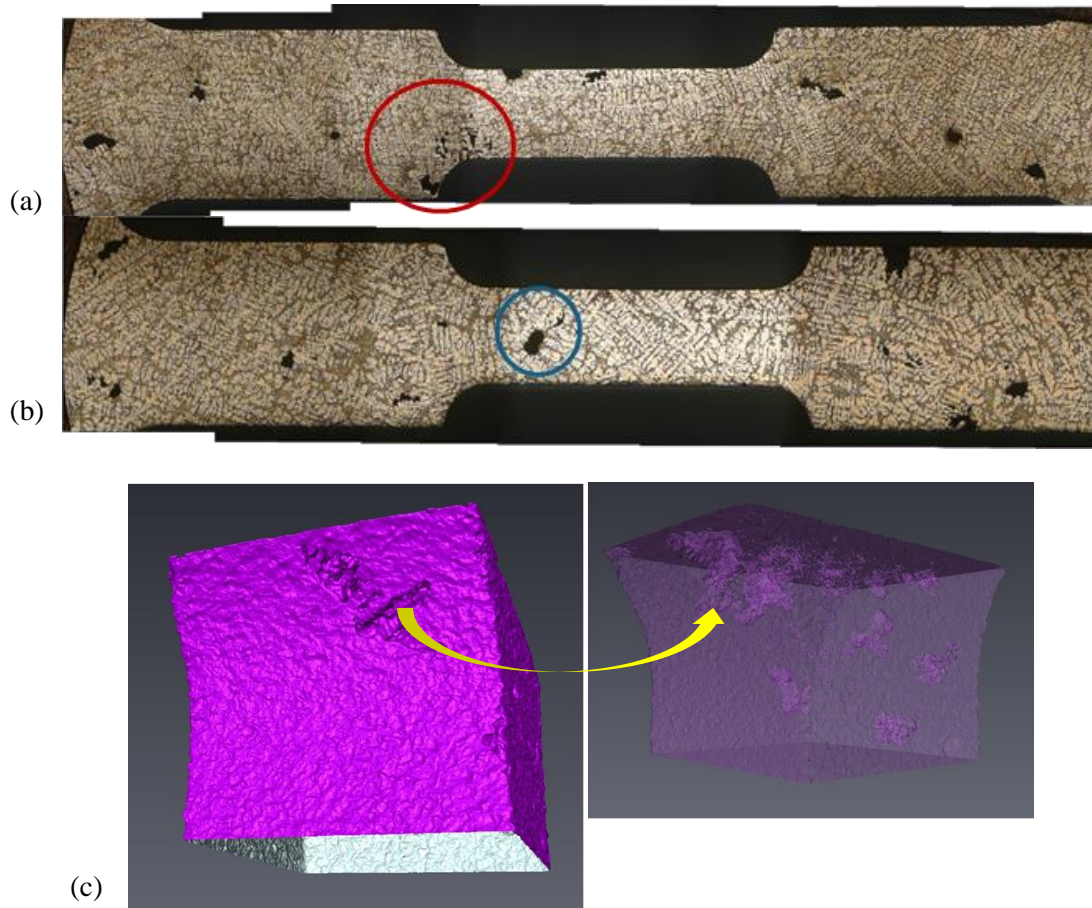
Examples of OM images on the surface of grinded specimens: (a) unselected and (b) selected. (c): One example of a large casting defect in the shoulder area on the 3D rendered surface (left) and in volume with the material set transparent (right)
